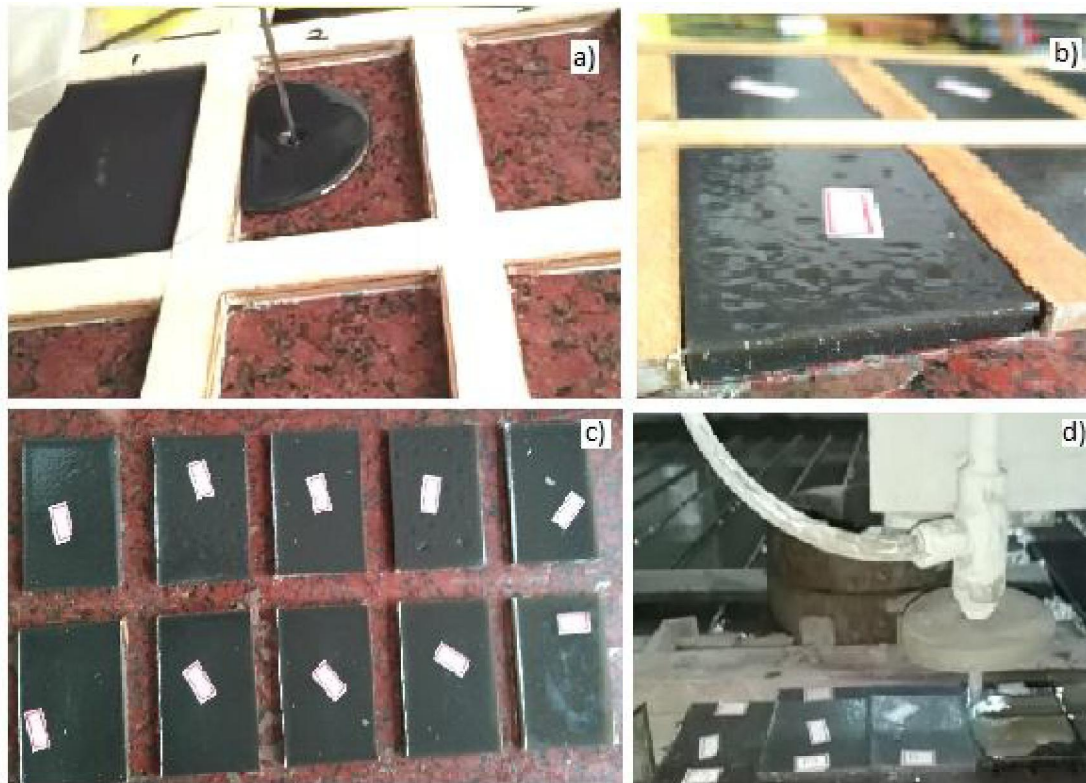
a) Pouring Mixture into cavity b) removing prepared samples c) Samples d) Water jet cutting for required dimensions
